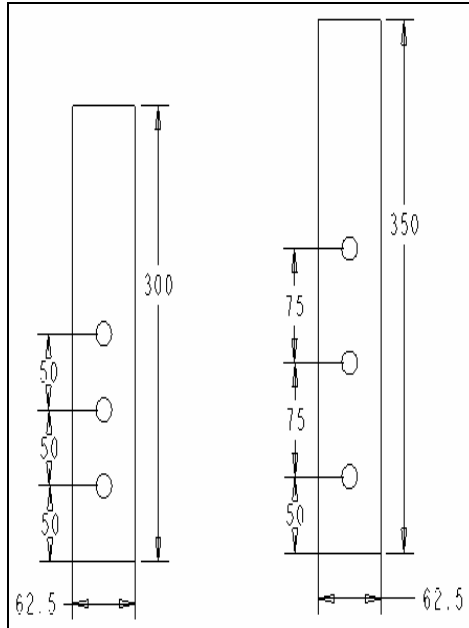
Bar stock grip geometry having 50 mm pitch & 75 mm pitch (Mild steel, 16 mm thick and bolt holes are 16mm in diameter)
